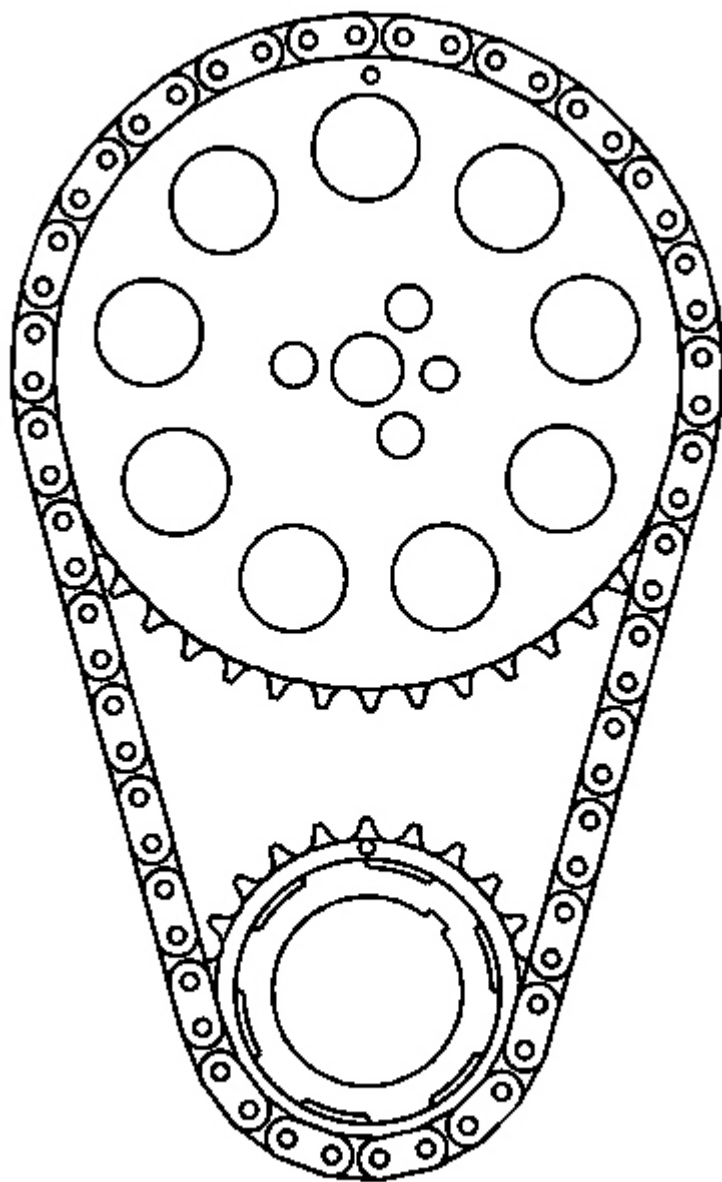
View of Crankshaft/Camshaft In Position For Number 1 Piston At TDC
